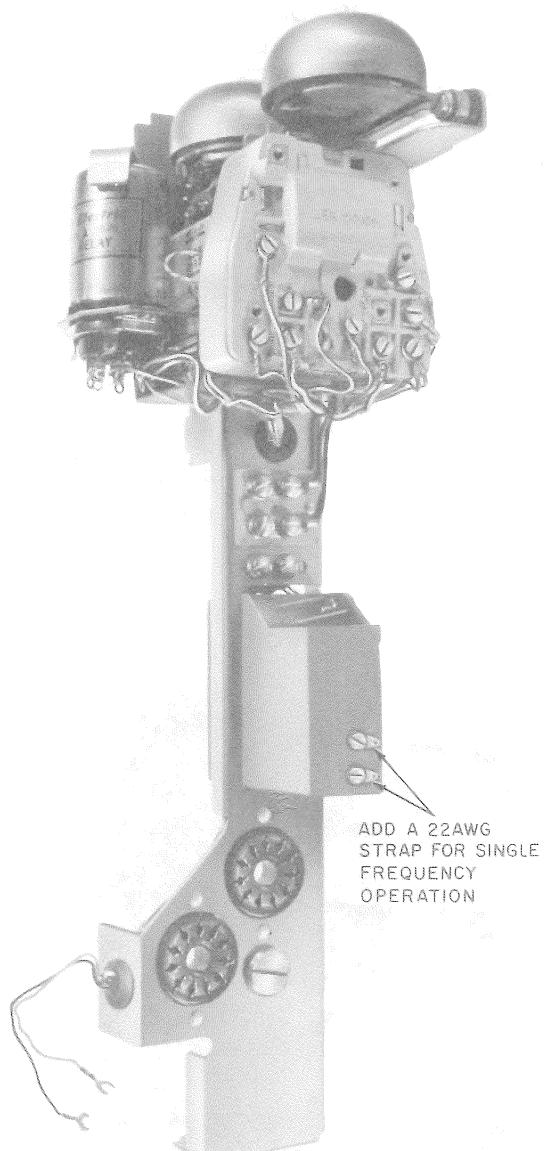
840693634 Coin Chassis—For Use in 1A/2A-Type Sets
